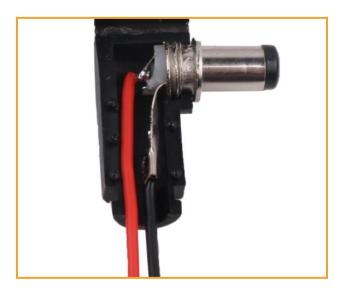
Schematic diagram of wire welding
